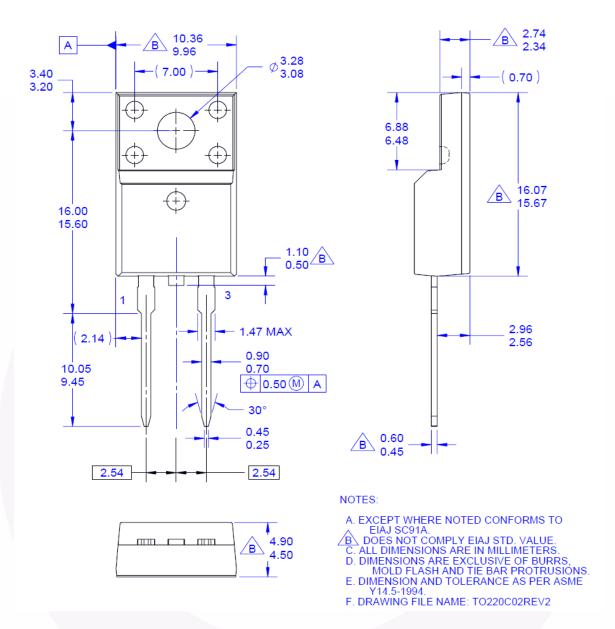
TO-220F 2L - 2LD; TO220; MOLDED; FULL PACK
